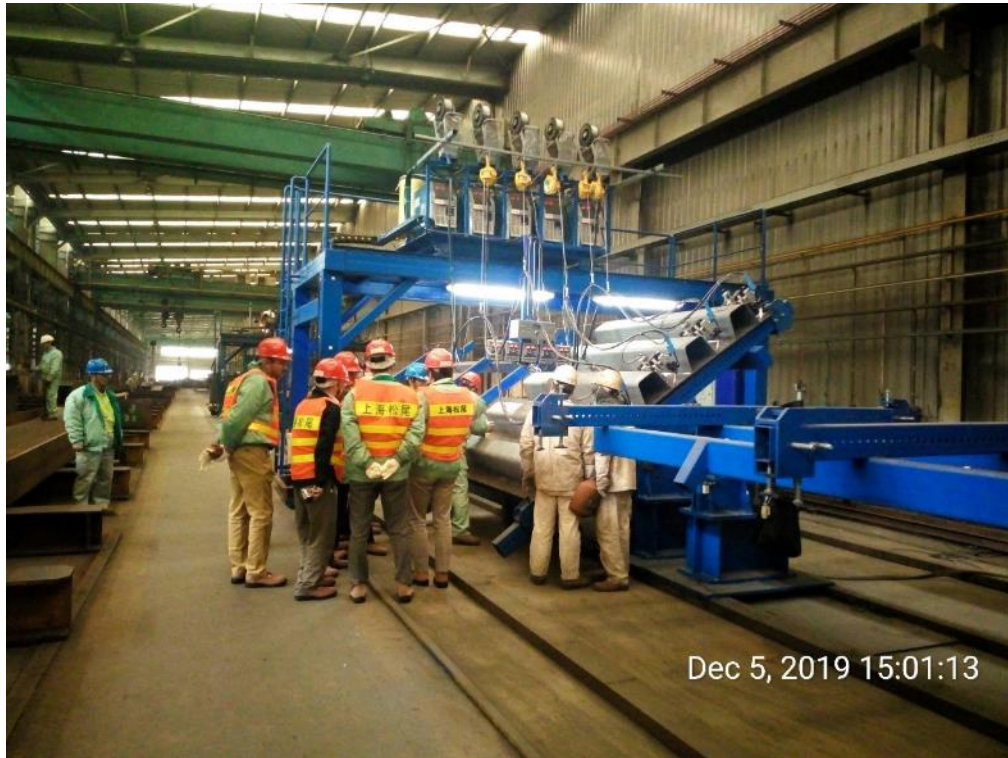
Site visit by MMRDA Officials and GC Team at the Structural Steel Manufacturing Plant Ms. Najing Iron & Steel Co. Ltd. China
